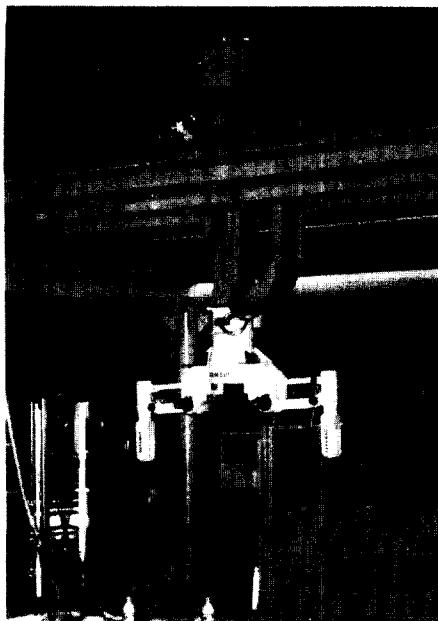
Sub-Assembly Welding Robot with 11-Axis Configuration
